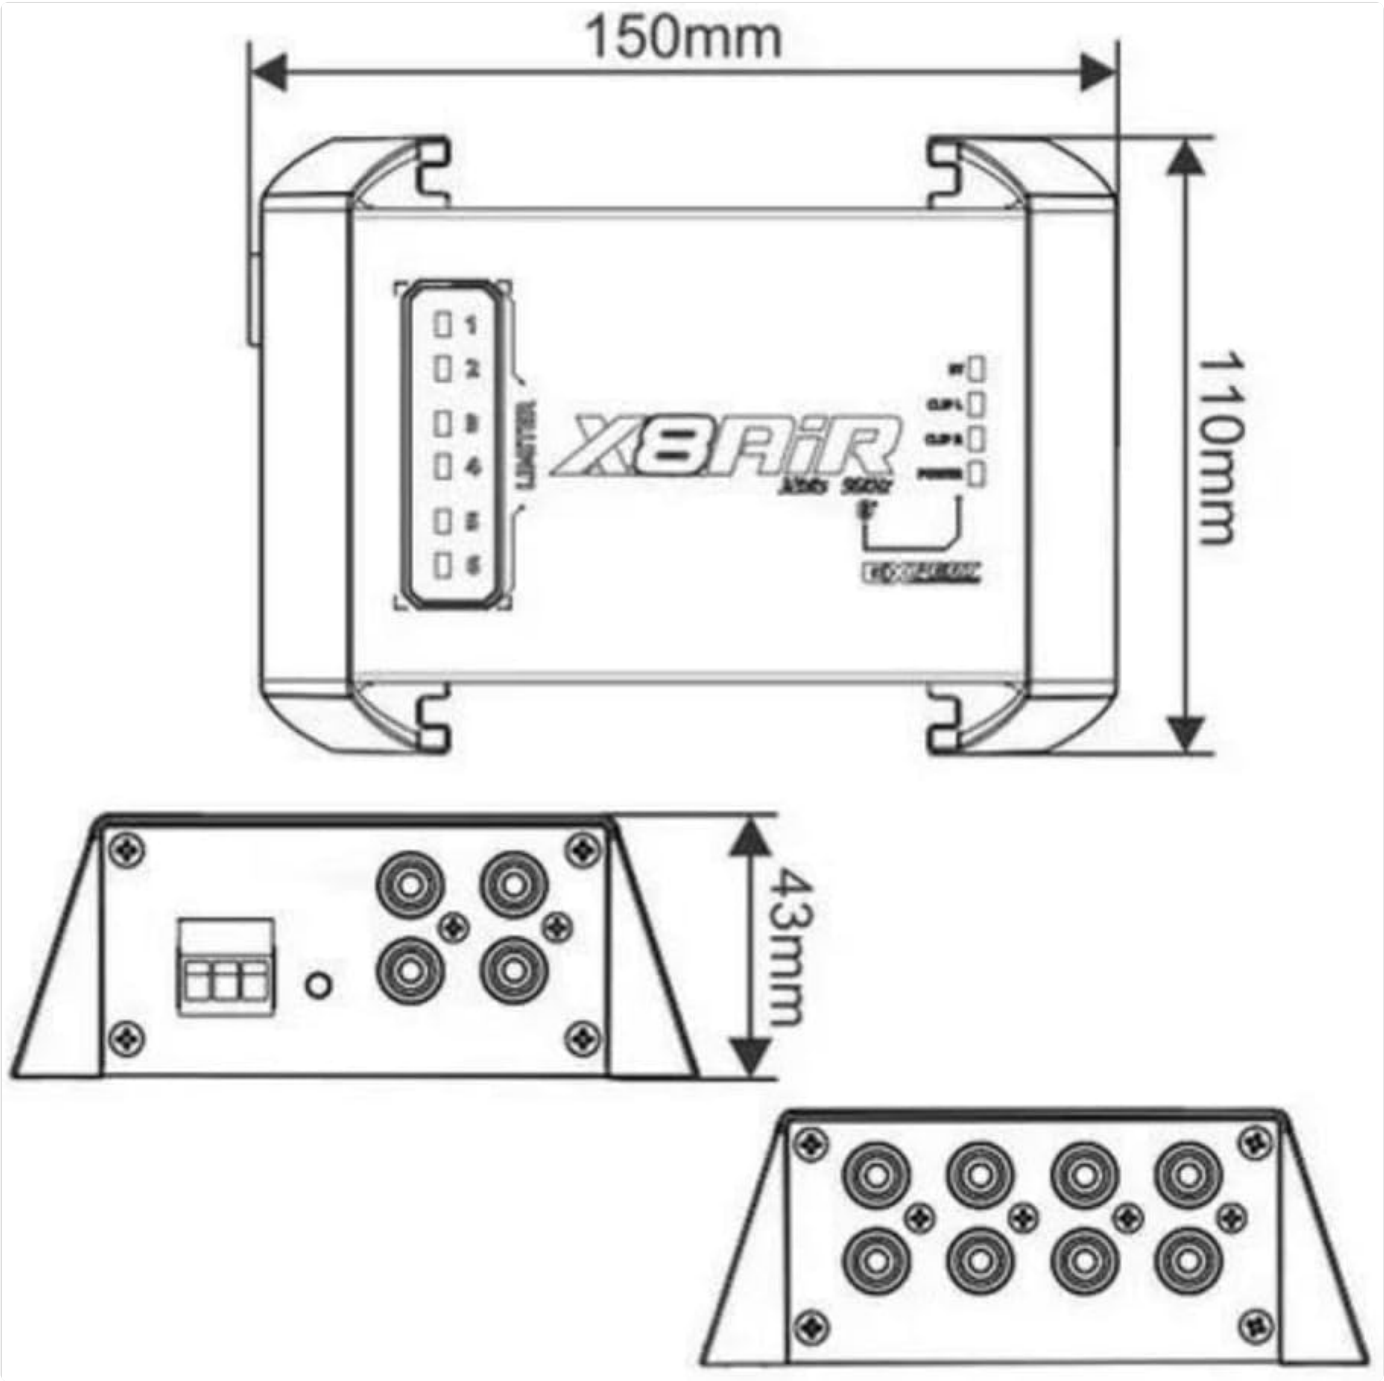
Dimensional drawing of the EXPERT X8AIR DSP, showing measurements in millimeters.
